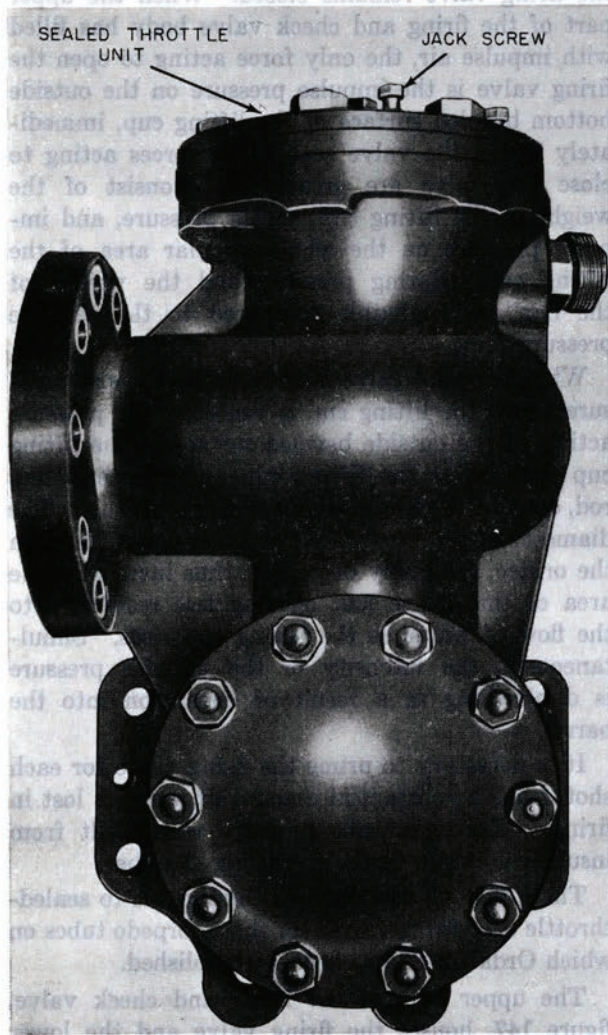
Firing and Check Valve Body (Sealed Throttle Unit Installed) Outboard Side.
